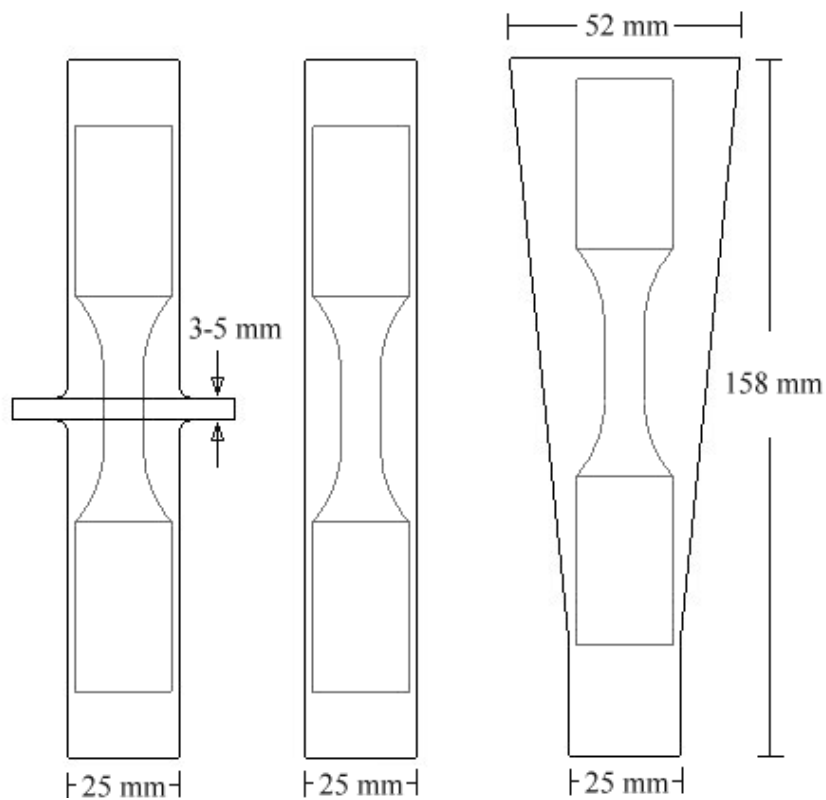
Specimen Locations with Respect to Cast Blank Geometry
